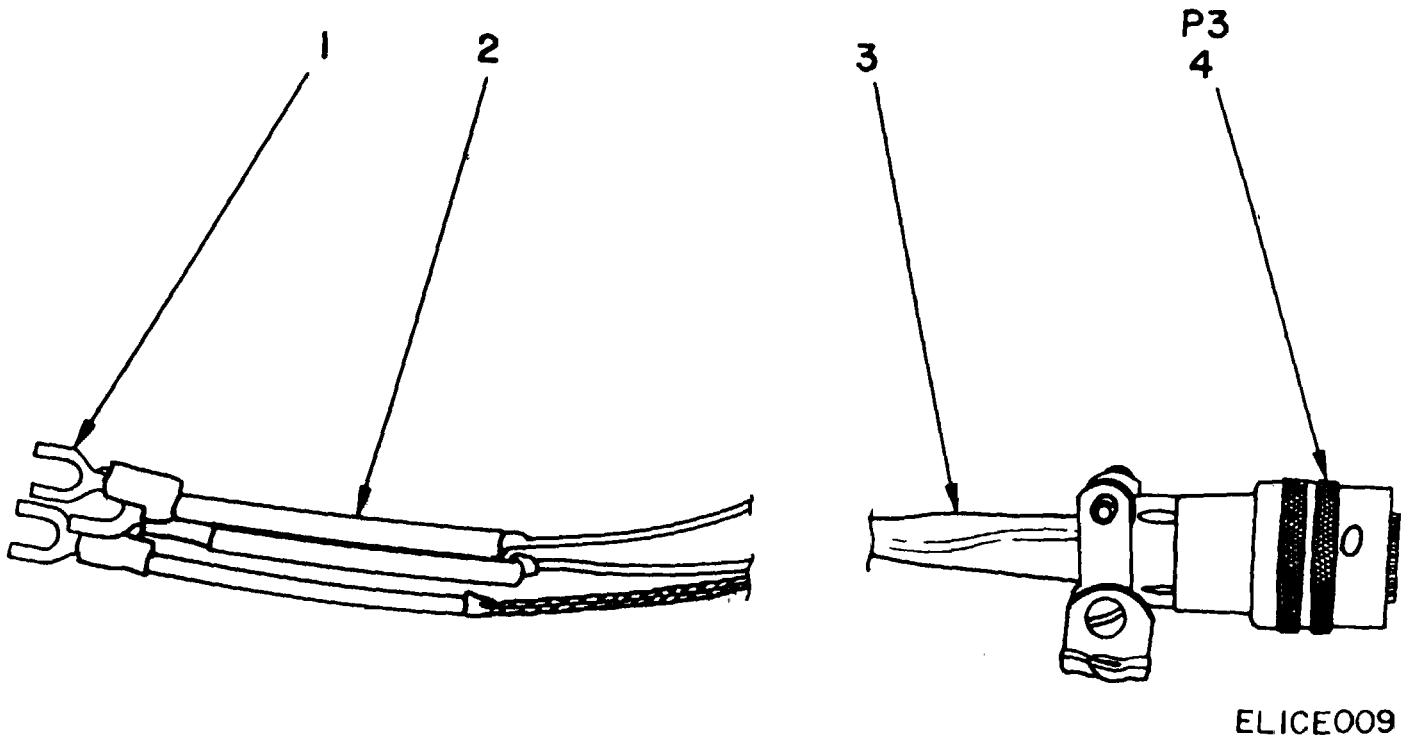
Cable Assembly, Special Purpose CX-10854/U
